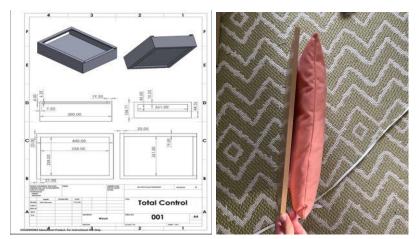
SOLIDWORKS drawing (left) showing the design of the final prototype of the total control case and its dimensions from four different views including top-down, left-side, right-side, and bottom-up view. Prototype manufactured using wood. Picture of the lap rest (right) used to fit into the bottom of the case.
